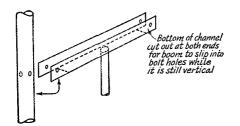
At W6VFR, the mounting plate is made from a length of "U"-channel iron cut and drilled as shown. The boom is raised vertically until one set of bolt holes is in line and a bolt is slipped through. The boom is then swung into its horizontal position and the other bolt is put in place.
